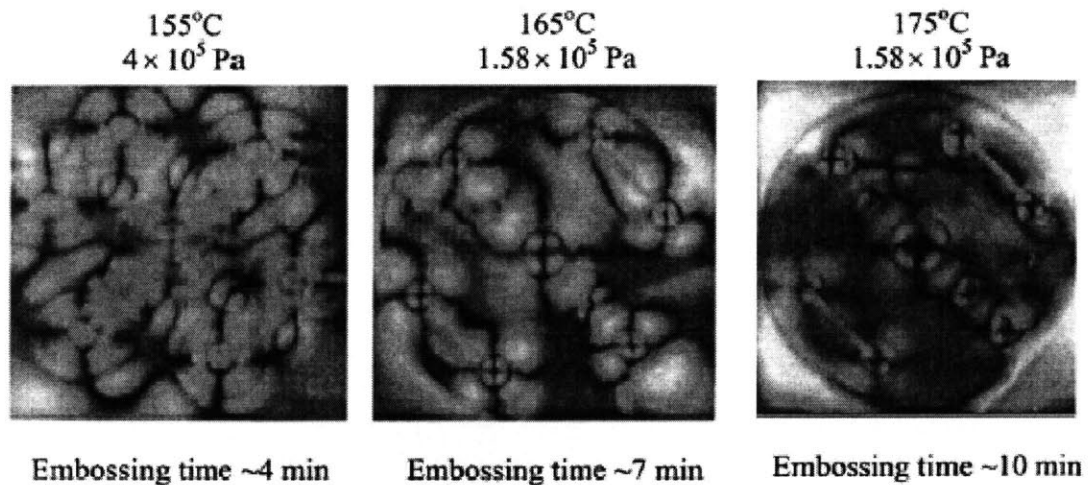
Birefringence Pattern in Molded PC Parts (from [26])
